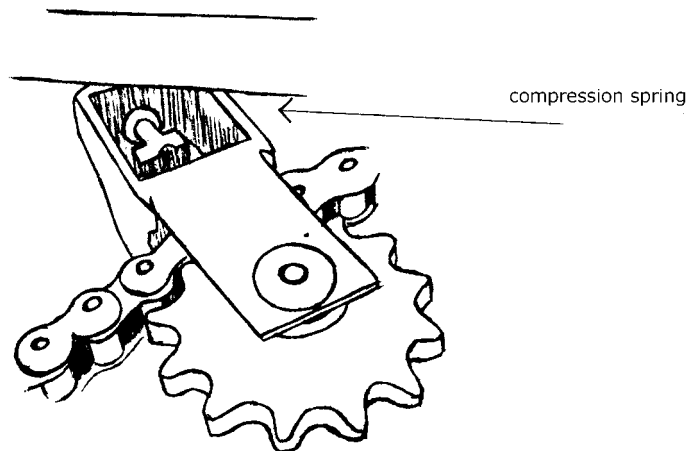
Idler sprocket keeps chain tight and insures that 1/3 of teeth are engaged on every sprocket. Note compression spring.
